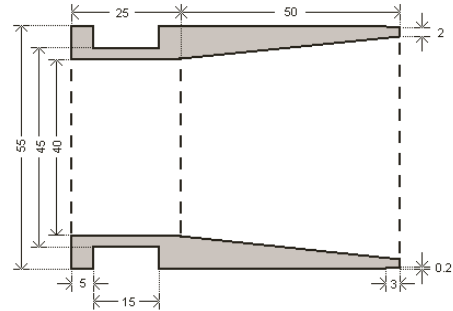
EB-welding drift tubes lathe made (Longitudinal section)
